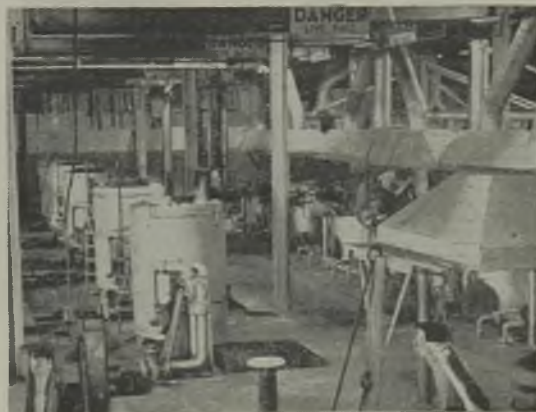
BATTERY OF MELTING FURNACES, WITH OVERHEAD MONORAIL CONVEYOR FOR TRANSPORTING MOLTEN ALLOY TO MAINTAINING FURNACES.
